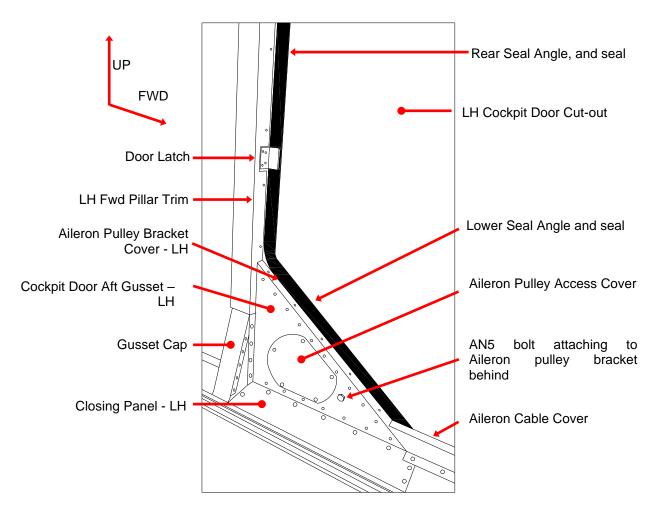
Cockpit Door Aft gusset - Component Removal at Rib 5 LHS
